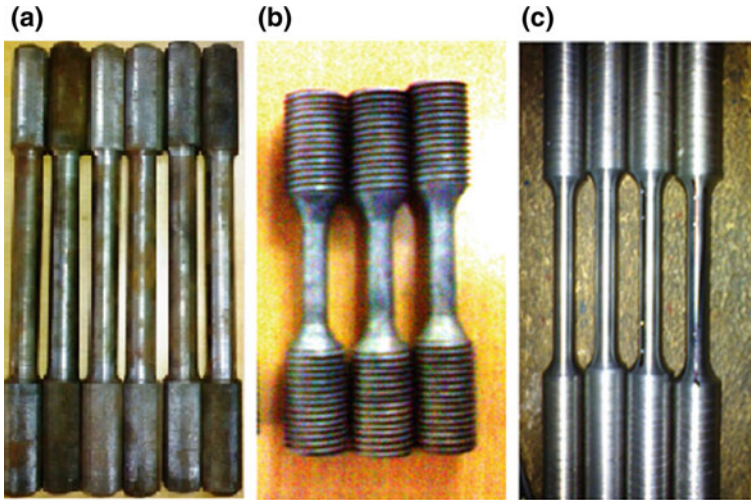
Tensile specimen: a Knurled, b Threaded, and c Unthreaded
